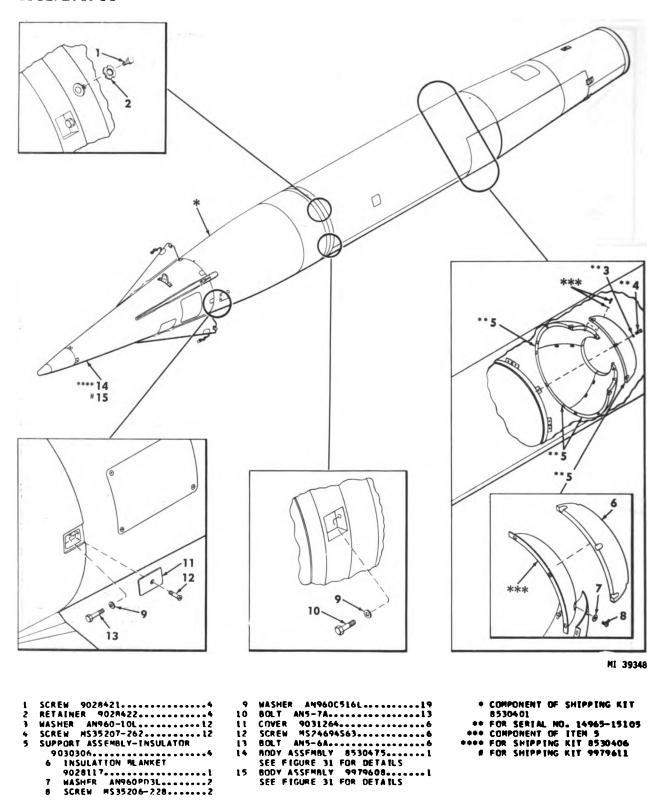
SHIPPING KIT, FORWARD AND AFT BODY ASSEMBLY, INSTALLED /8530406 AND 9979611/
